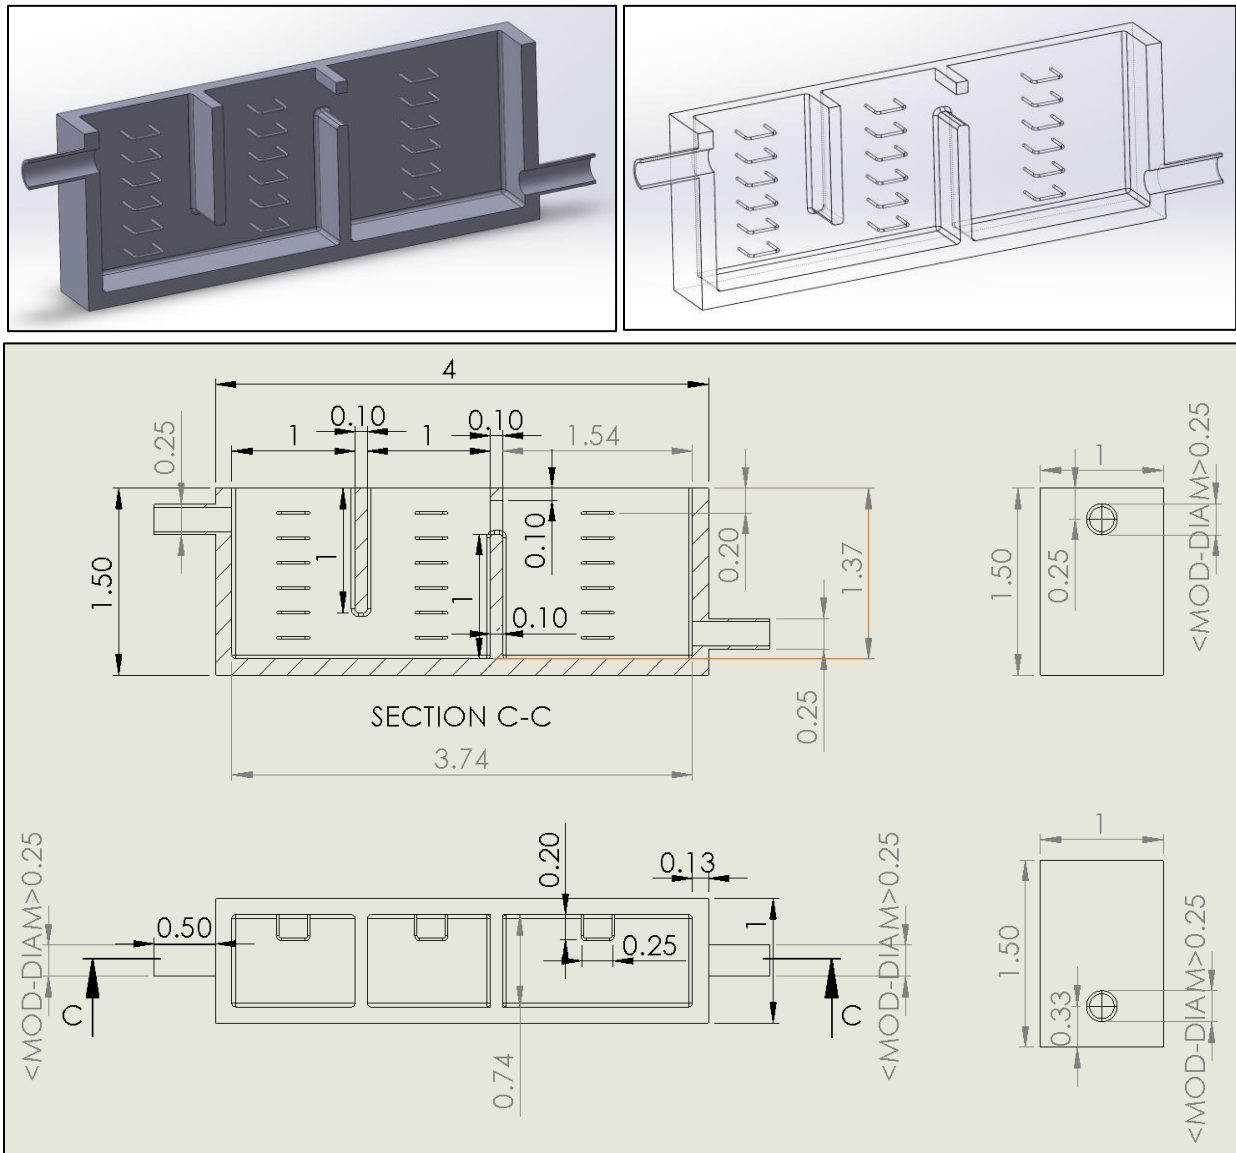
Pictures and dimensions of sediment filter. Order of views from left to right, top to bottom: solid, wireframe, side with section cut, front, top, back.
